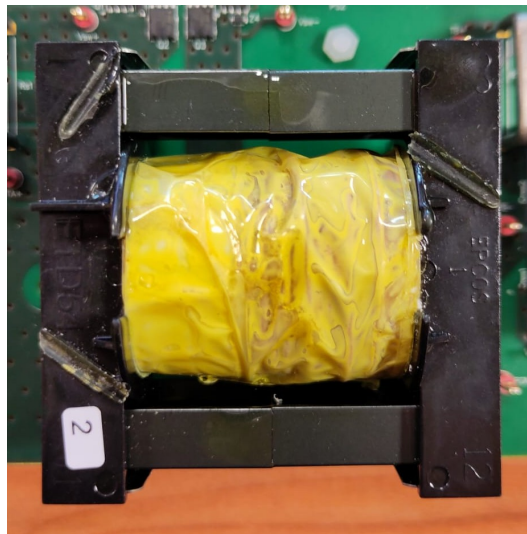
Photo of the transformer prototype, soldered on the PCB
